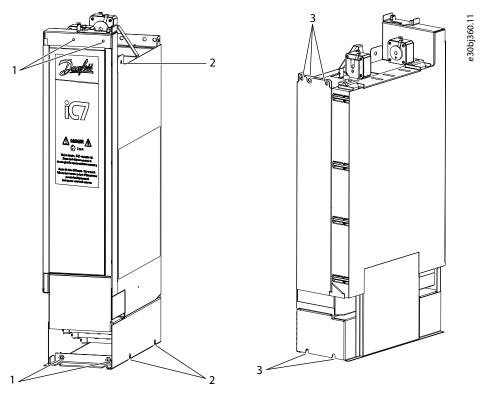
Mounting Holes for IM10, IM11, AM10, AM11
